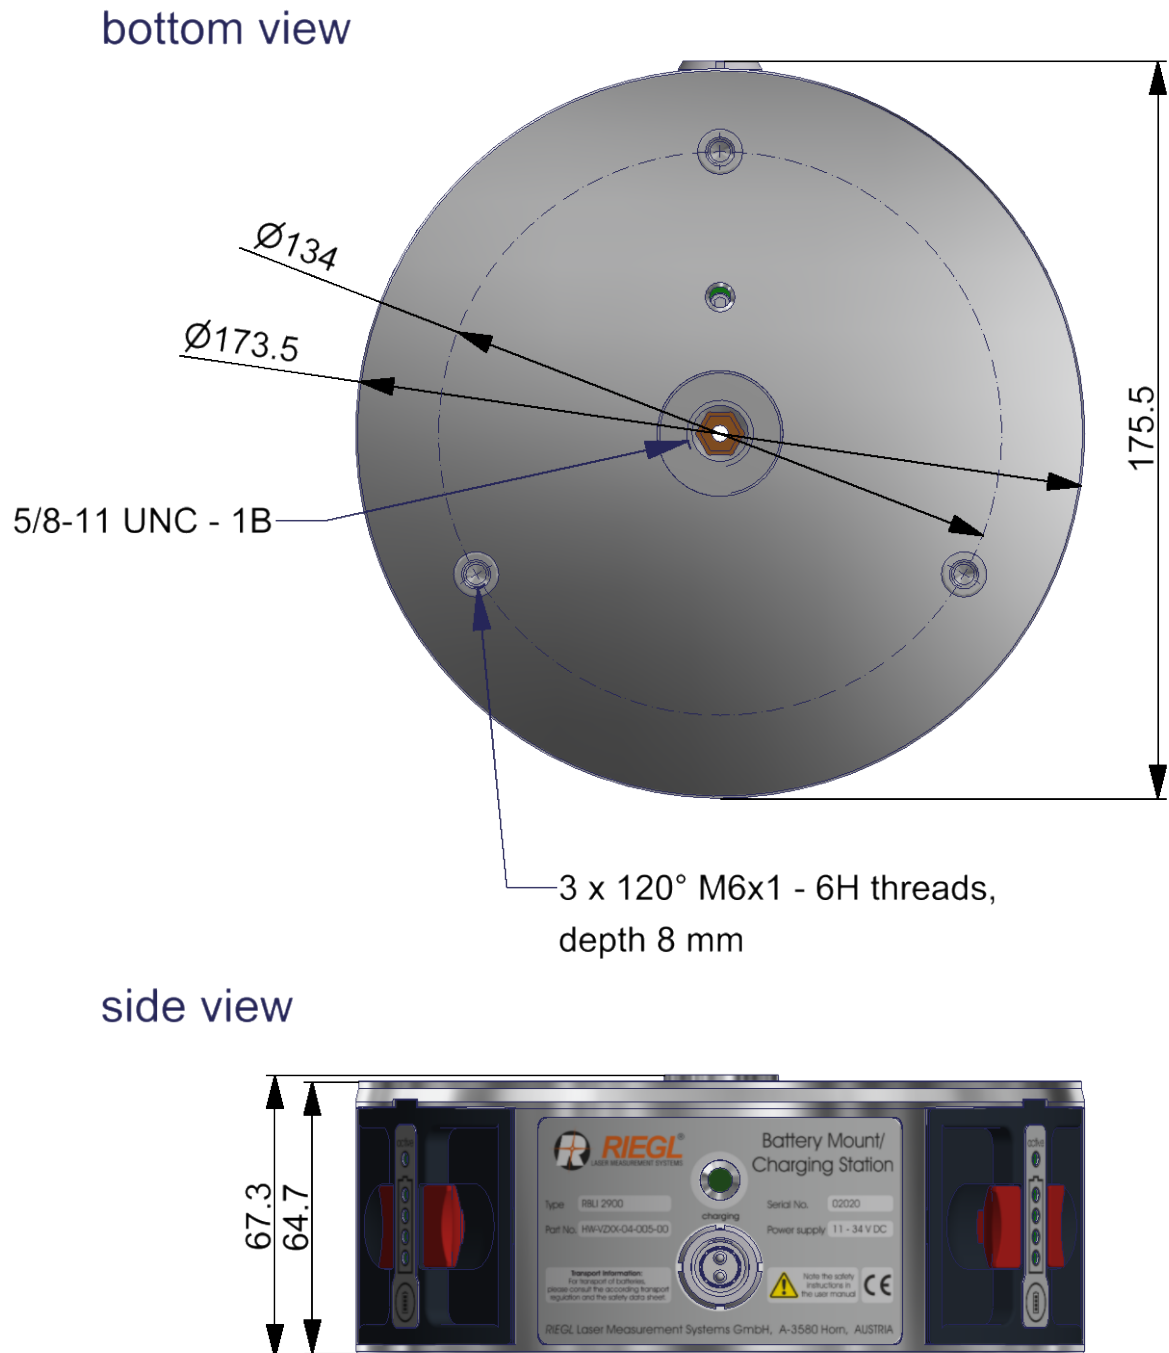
Bottom view and side view of the Battery Mount / Charging Station RBLI 2900
